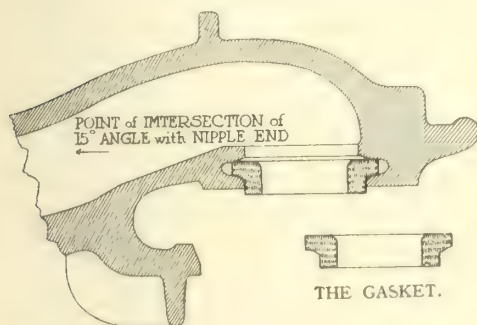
M.C.B. Standard Air Brake Hose Gasket.
